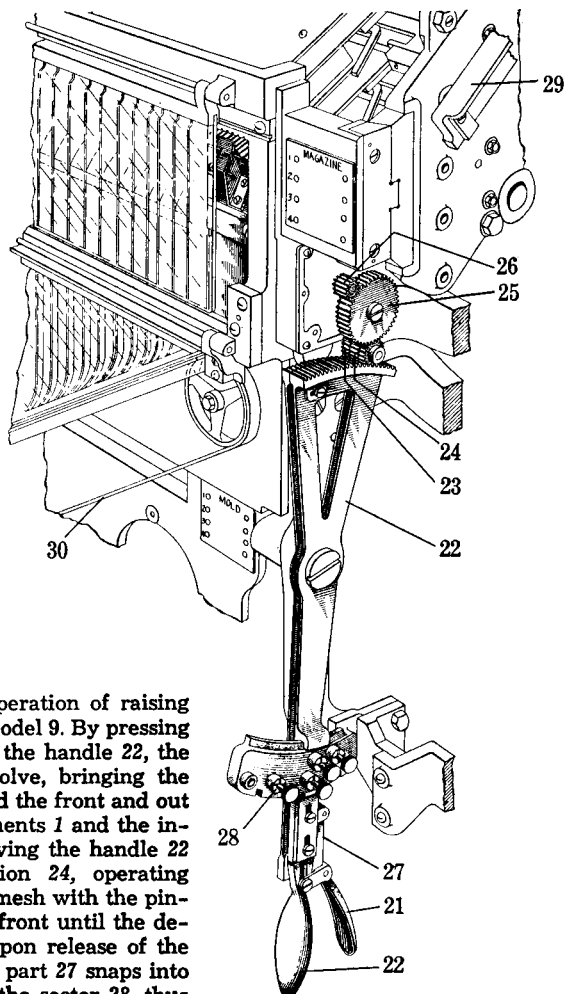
View showing operation of raising and lowering the front on Model 9. By pressing the handle lever 21 against the handle 22, the pinion 23 is caused to revolve, bringing the subsidiary key rods 3 toward the front and out of register with the escapements 1 and the intermediate levers 4. By moving the handle 22 forward or back the pinion 24, operating through an idler gear 25 in mesh with the pinion 26, raises or lowers the front until the desired position is reached. Upon release of the handle lever 21, the locking part 27 snaps into one of the four notches on the sector 28, thus securely and accurately holding the front in position. At the same time the pinion 23 is caused by a spring, not shown in the drawing, to revolve and thereby move the frame carrying the subsidiary key rods 3 rearward against a stop and in register to operate the escapements on the magazine.
